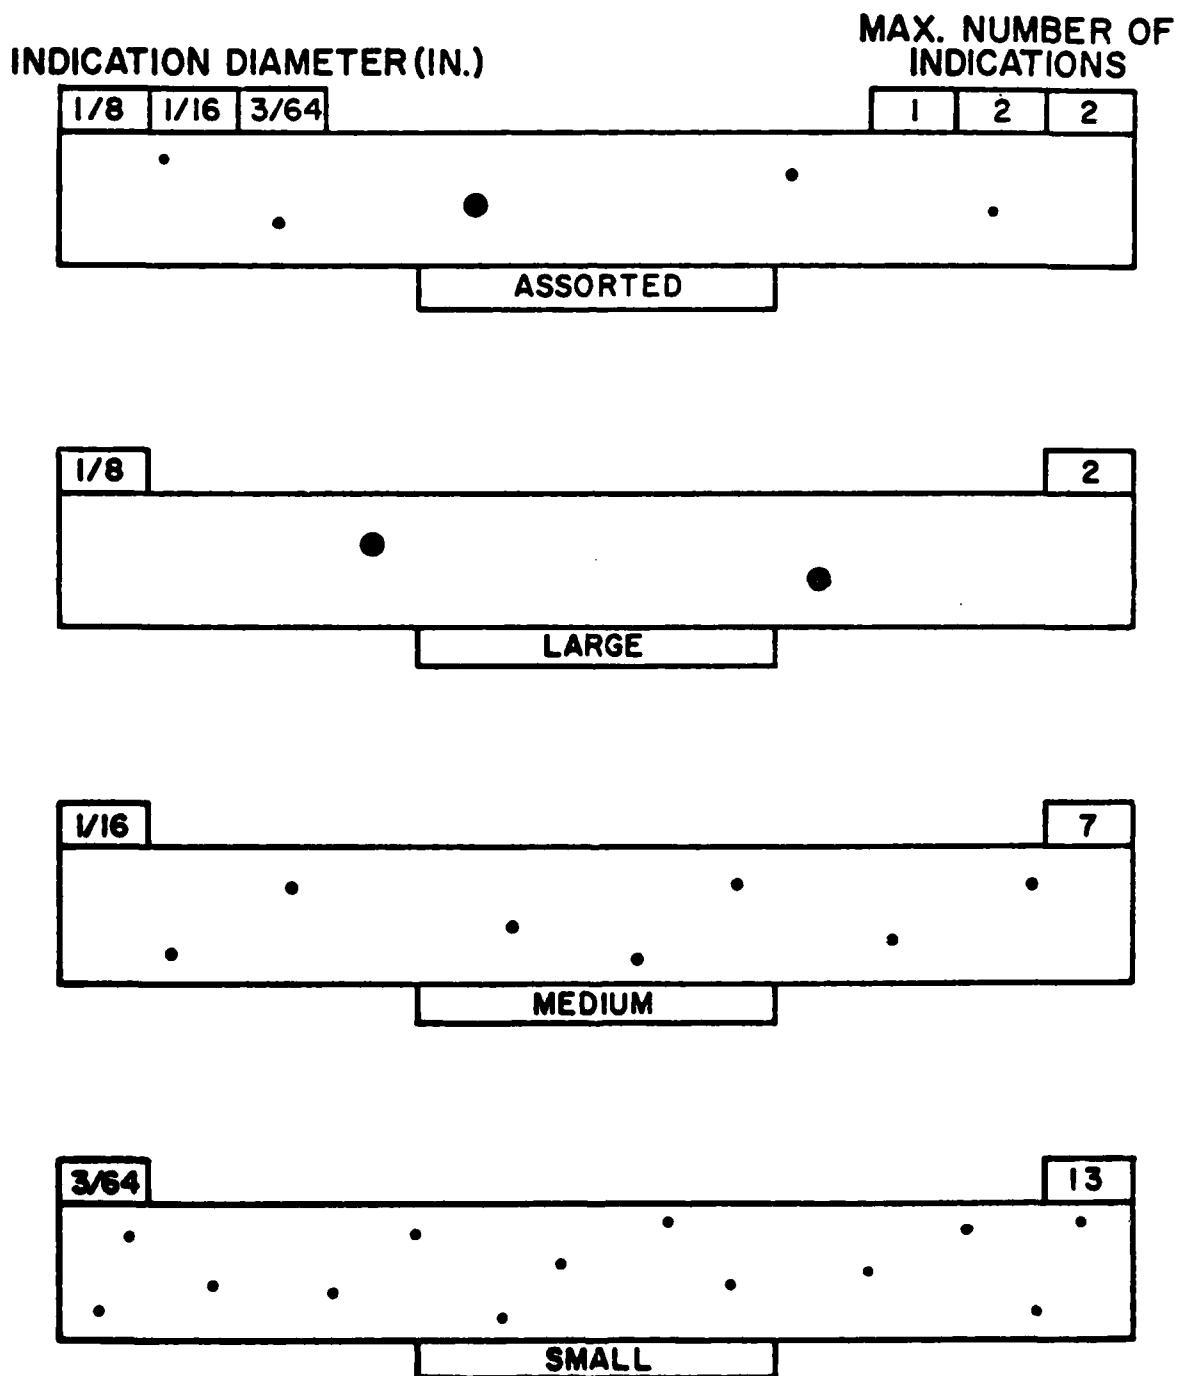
Class 2 Weld Surface Inspection Standards for Scattered Rounded or Non-Linear Indications (Sheet 5 of 6).
